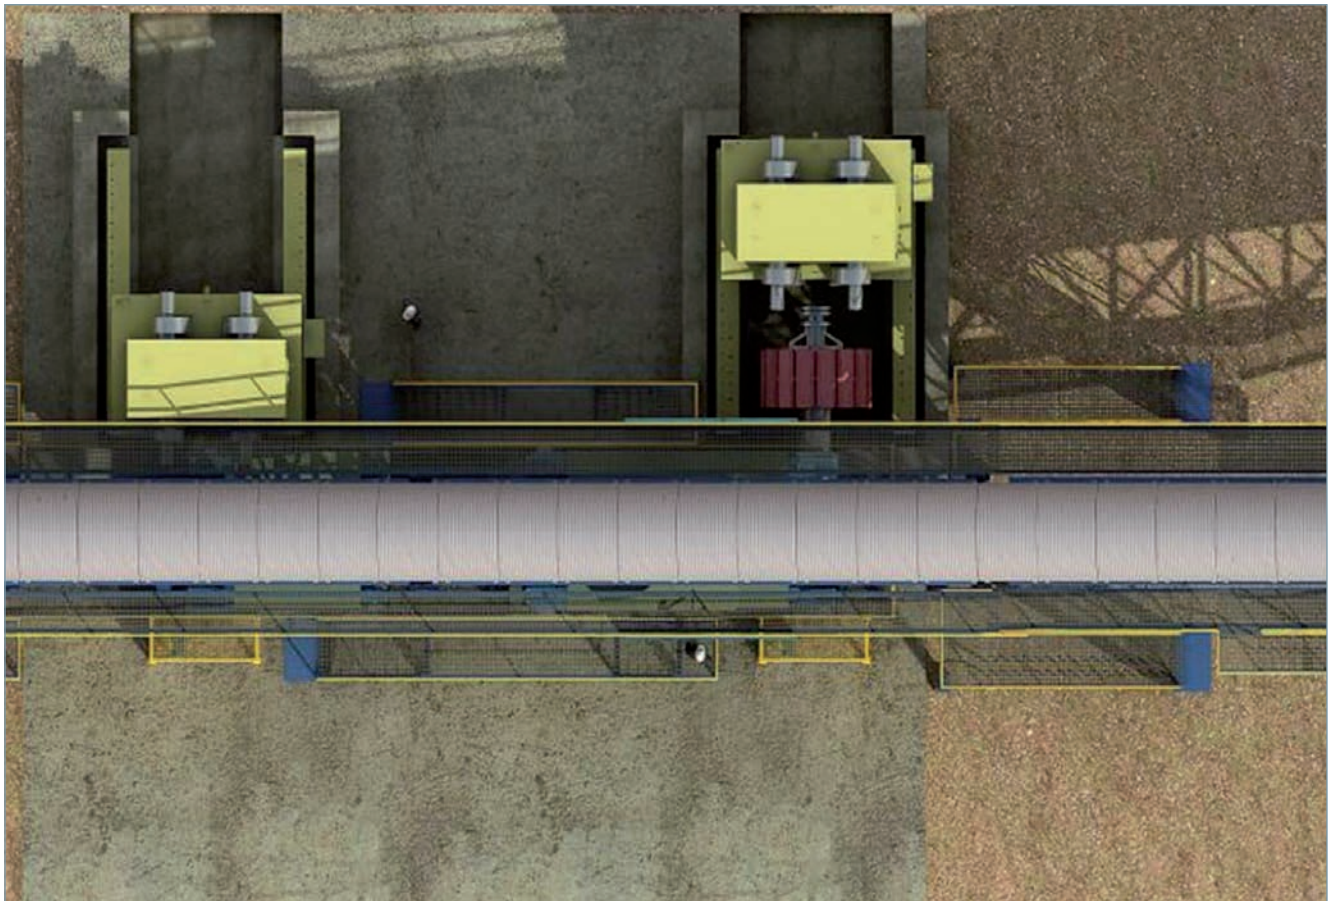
Top view of two (2) gearless drive synchronous motors; one is in the maintenance position with a shifted stator
